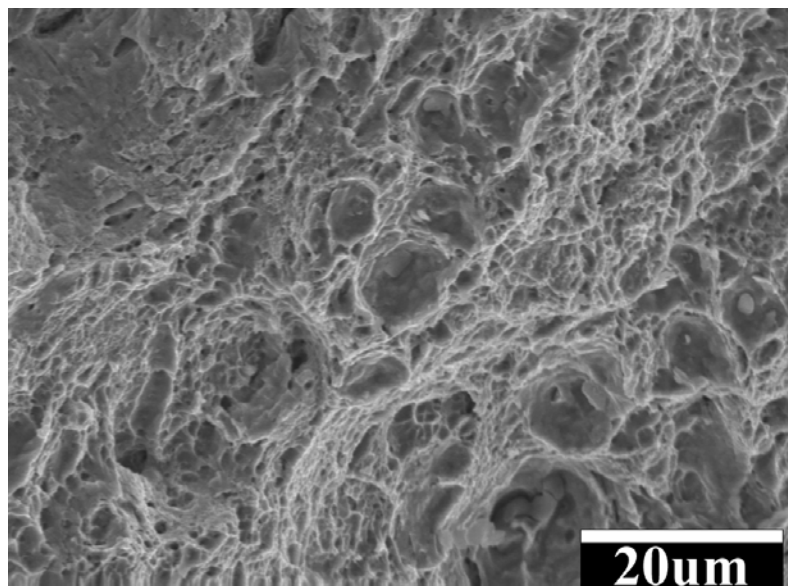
Microscopic View of the Final Fracture Region on a Strain Control Truncated Cone Specimen Fracture Surface, $\epsilon_a = 0.004$ (Specimen A4)
